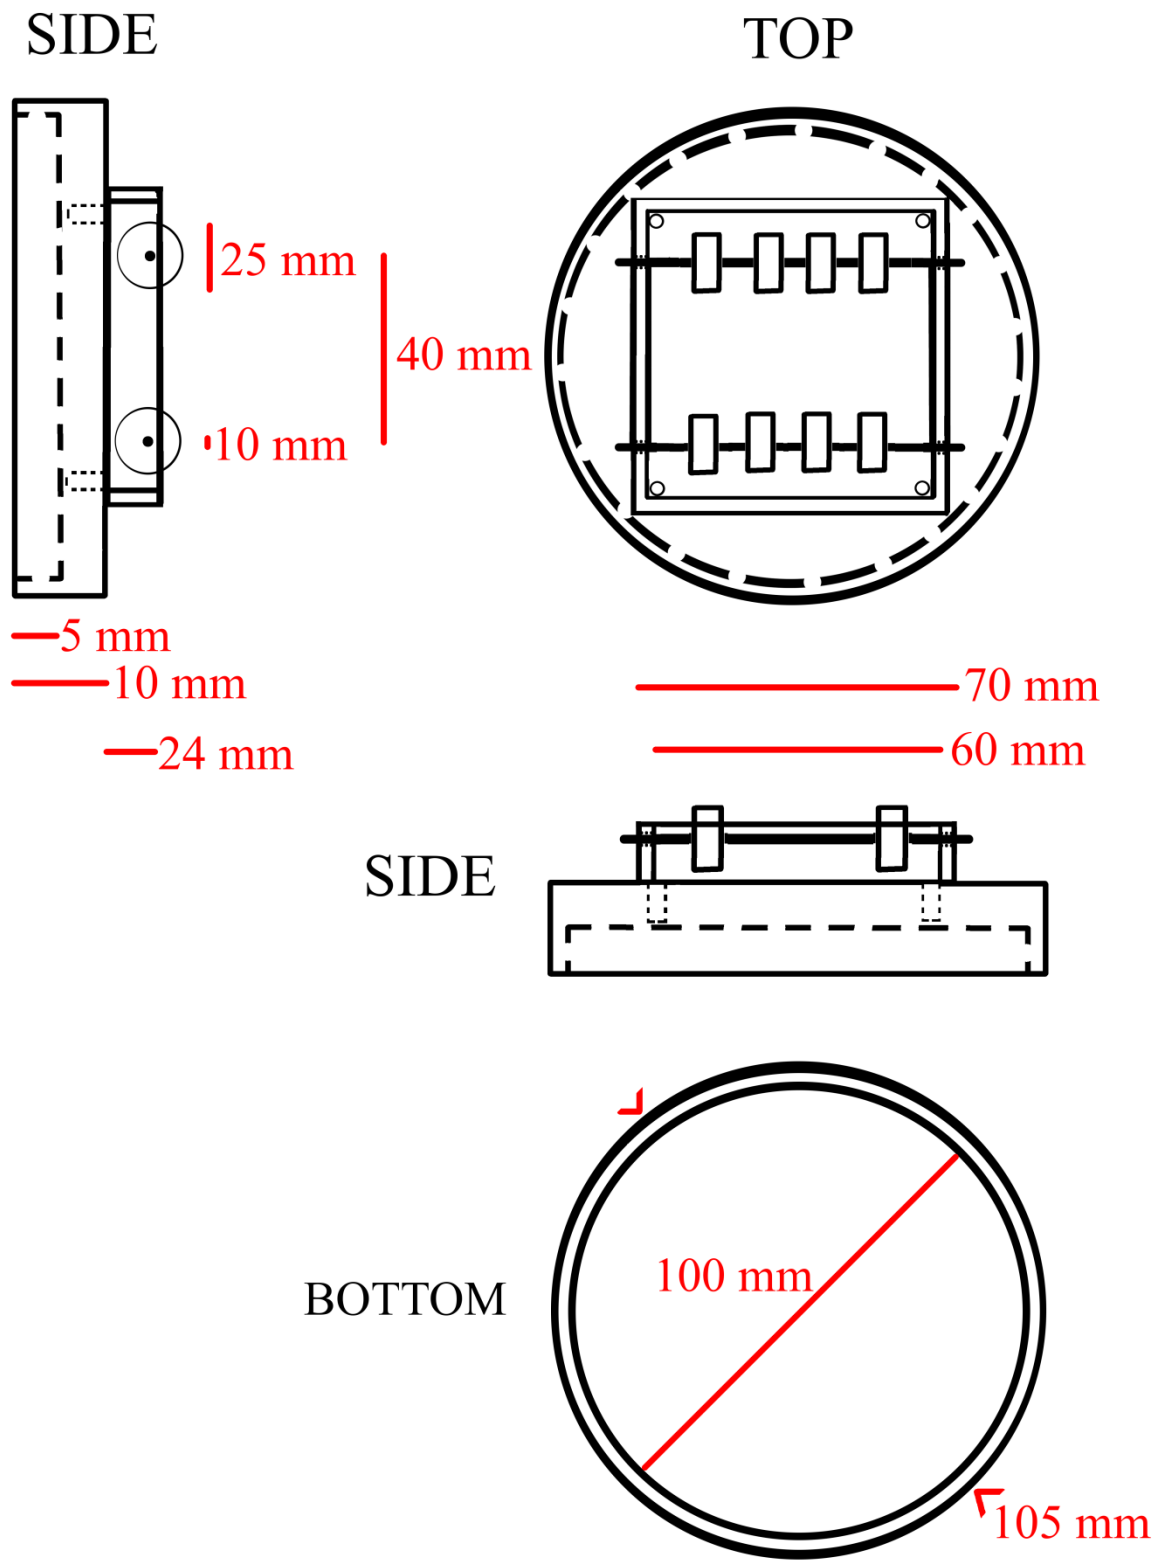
Blueprint for the custom built roller bolster. Dashed lines represent hollow areas for the insertion of the bolster head and guide pins.
